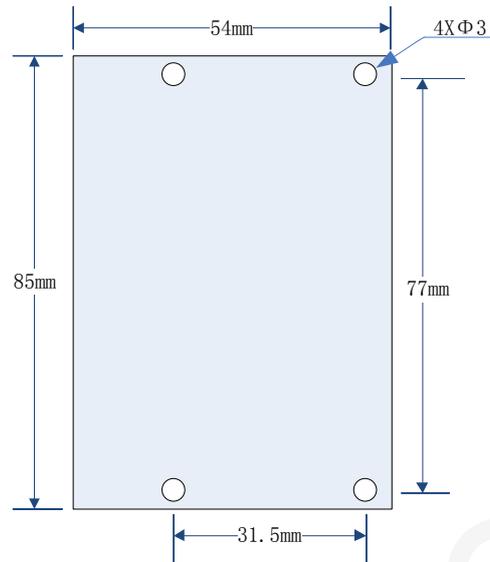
External Dimensions and Hole Locations(Sub Board)
